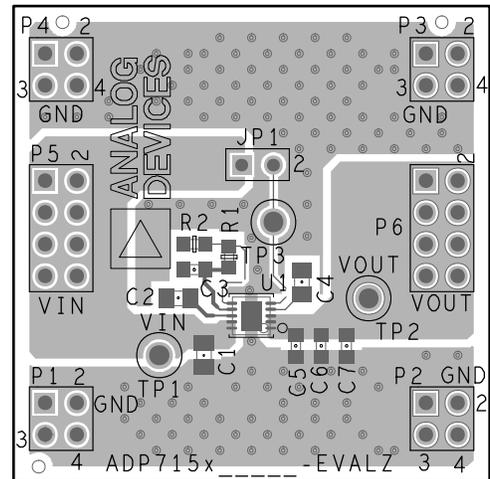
ADP7156CP-3.3EVALZ Printed Circuit Board (PCB) Layout
